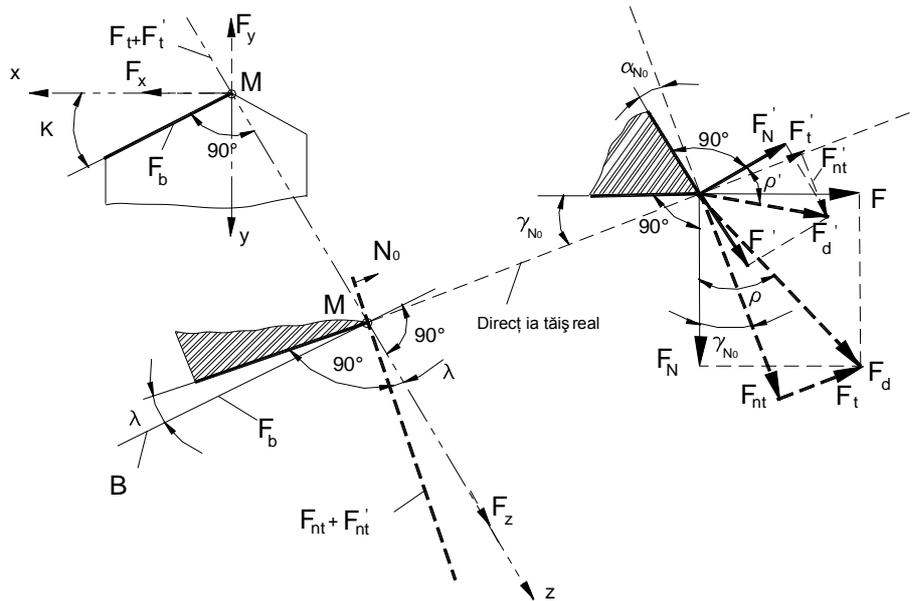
Physical and geometrical model of the forces on the single-point cutting tool
